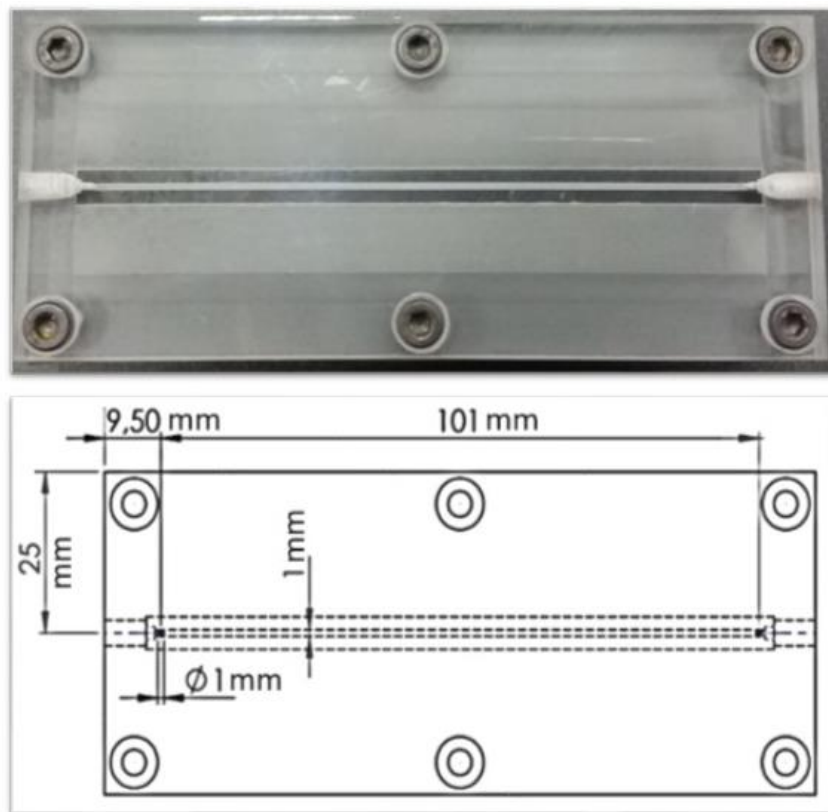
Top view and CAD drawing of the straight channel micro-cell.
